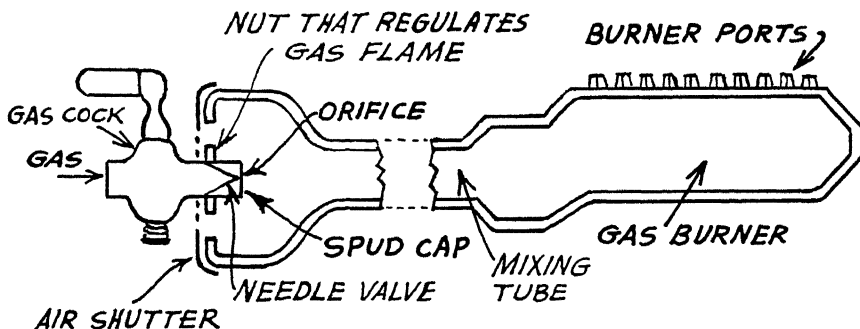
Parts of gas burner showing provision for flame adjustment.
